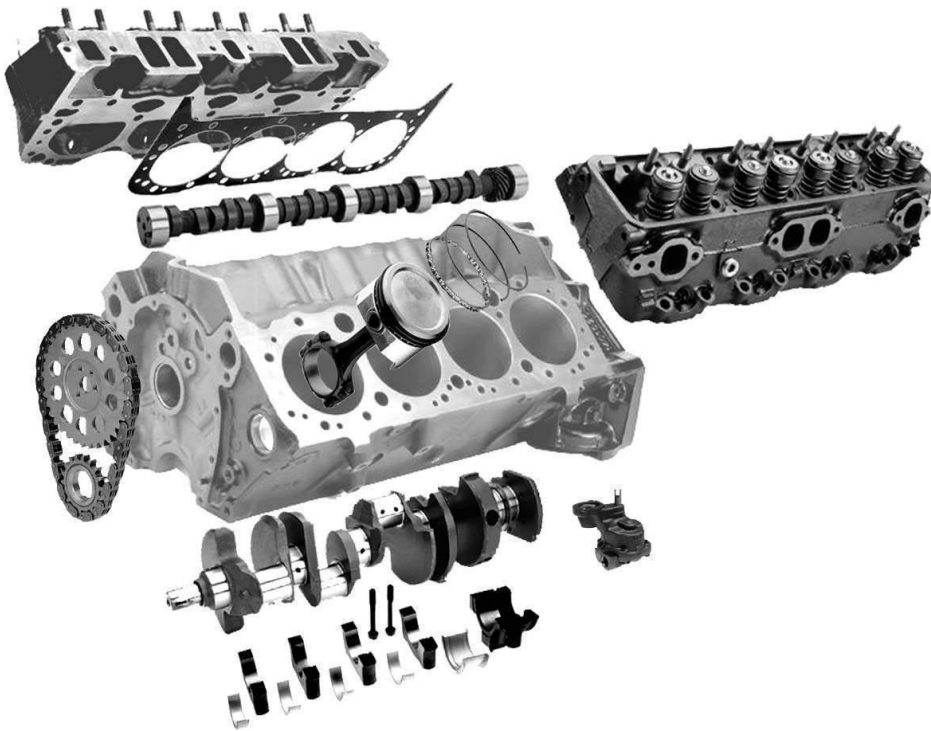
EXAMPLE OF A DIESEL ENGINE ASSEMBLY
